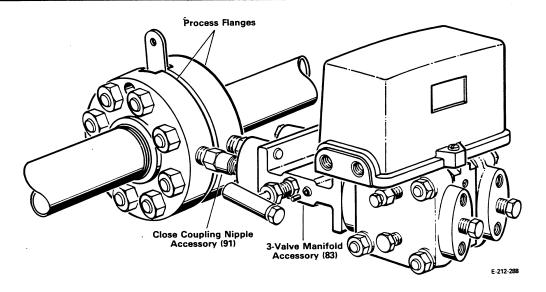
Transmitter Mounted with Close Coupling Nipples, Accessory 91
